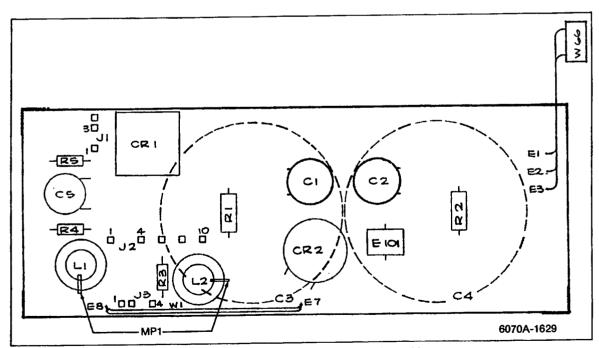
A5A4 Input Rectifier PCB Assembly
